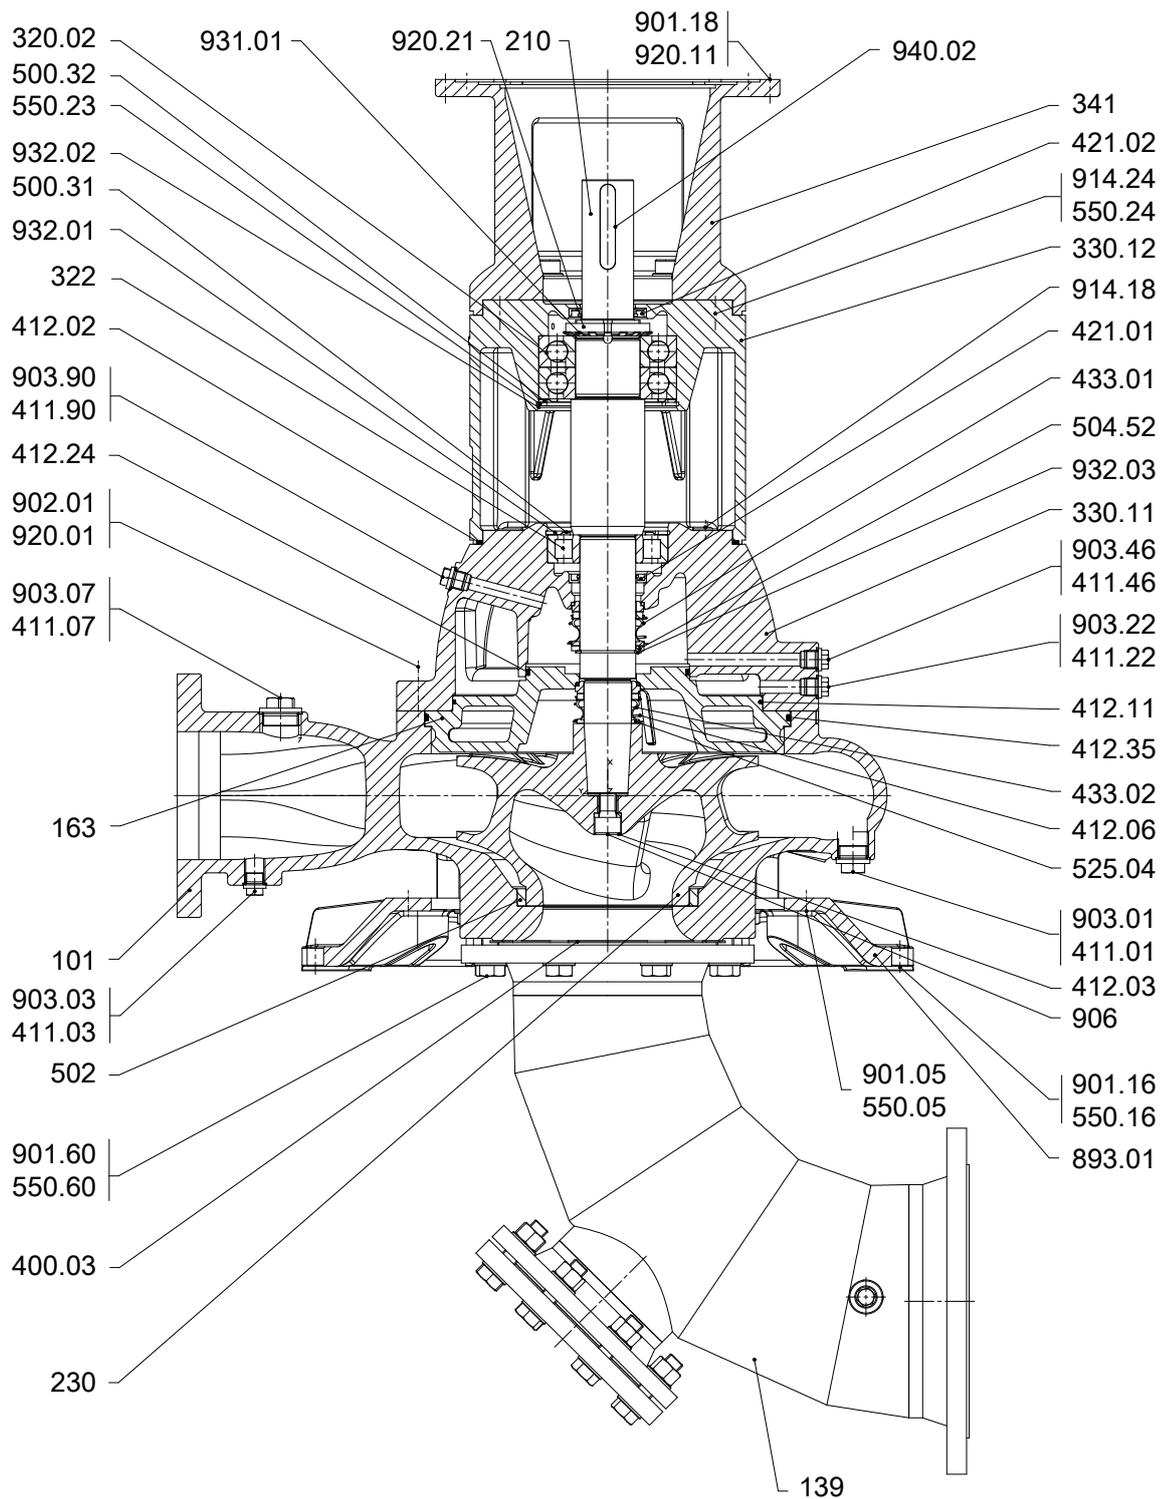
Sewatec with E impeller – pump for underfloor installation and installation with universal-joint shaft
